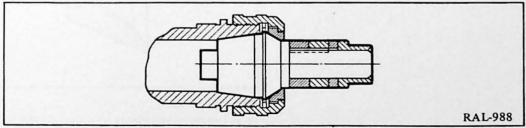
STUB ARBORS WITH COLLARS AND NUT *These collets supplied with machine.
